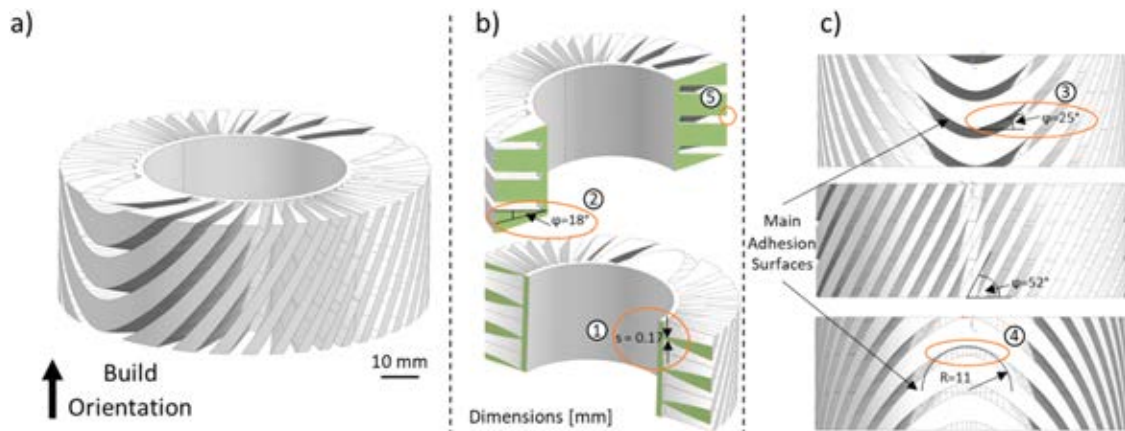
Ideal winding former with critical design elements 1-5: (a) overall view, (b) cut section views, and (c) side views.
